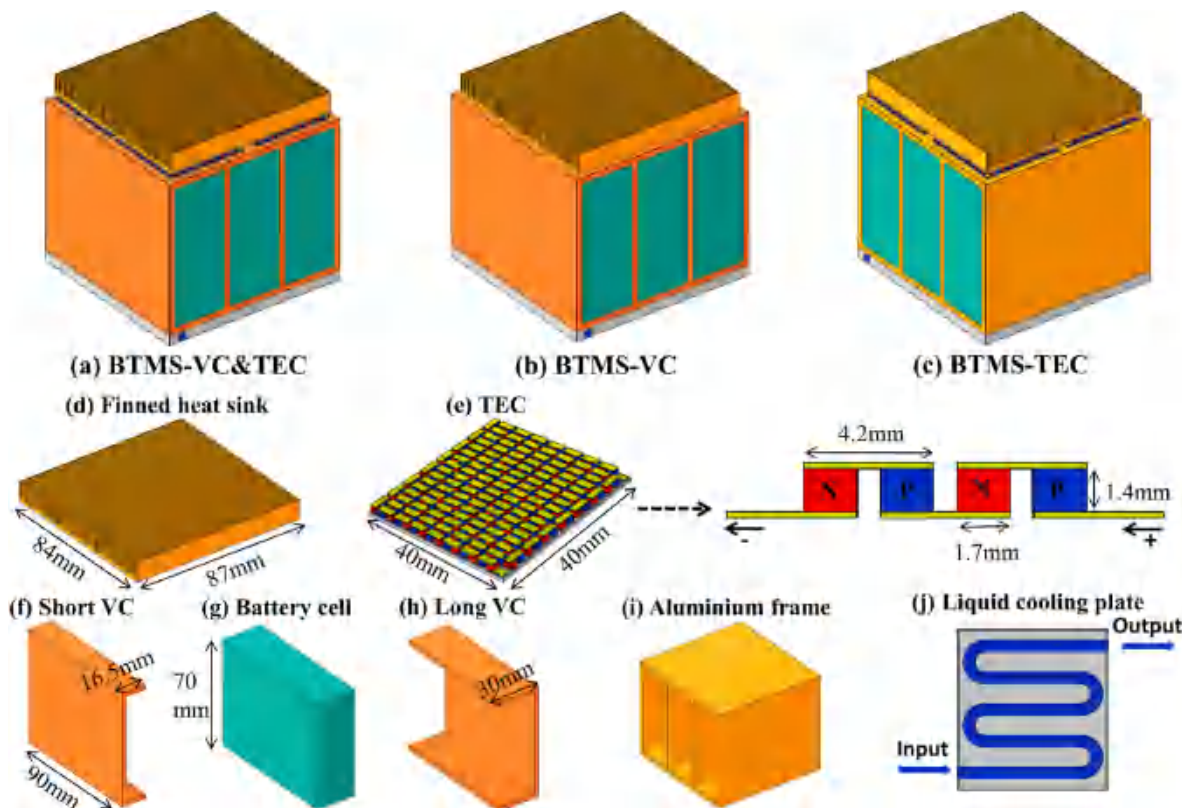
Structure of the BTMS. (a) BTMS-VC&TEC; (b) BTMS-VC; (c) BTMS-TEC; (d) Finned heat sink; (e) TEC; (f) Short VC; (g) Battery cell; (h) Long VC; (i) Aluminium frame; (j) Liquid cooling plate.
